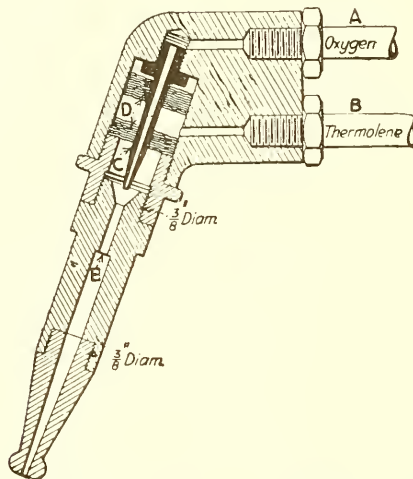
Details of the Thermalene Welding Torch Head.
